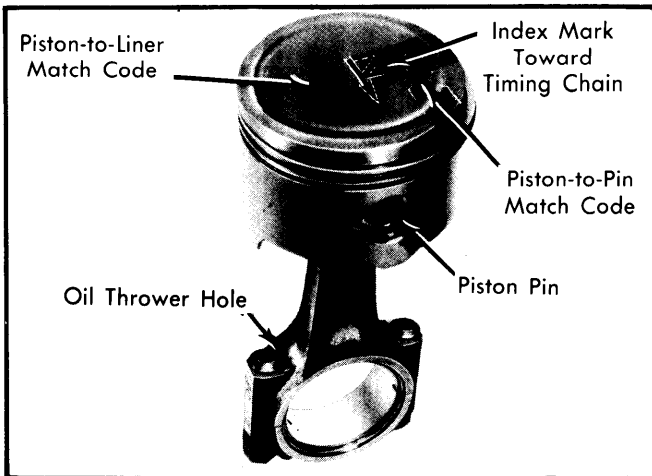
Piston and Rod Assembly with Index Marks and Codes
